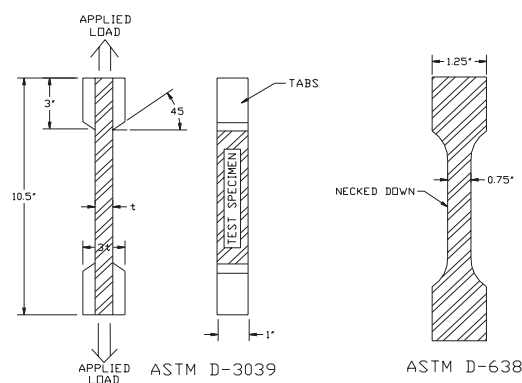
Test Specimen Configuration for ASTM D-3039 and D-638 Tensile Tests (Structural Composites, Inc.)
